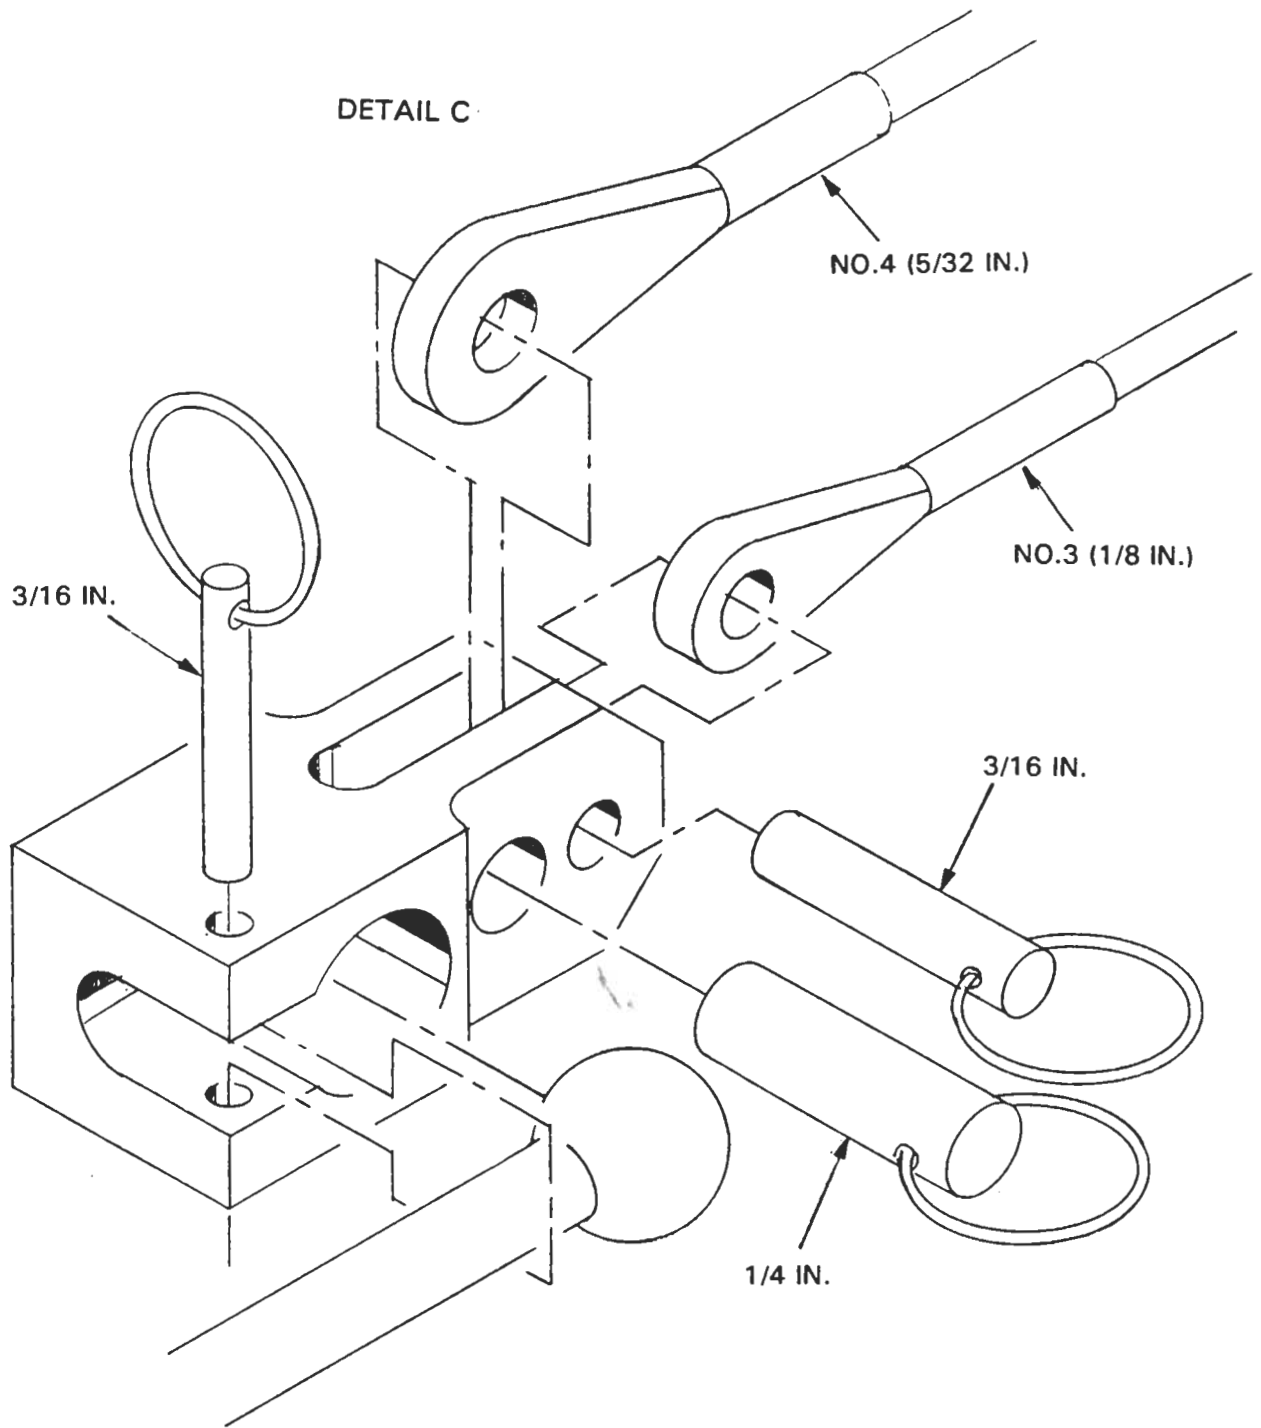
Cable Tensiometer Test Setup (Sheet 3)
